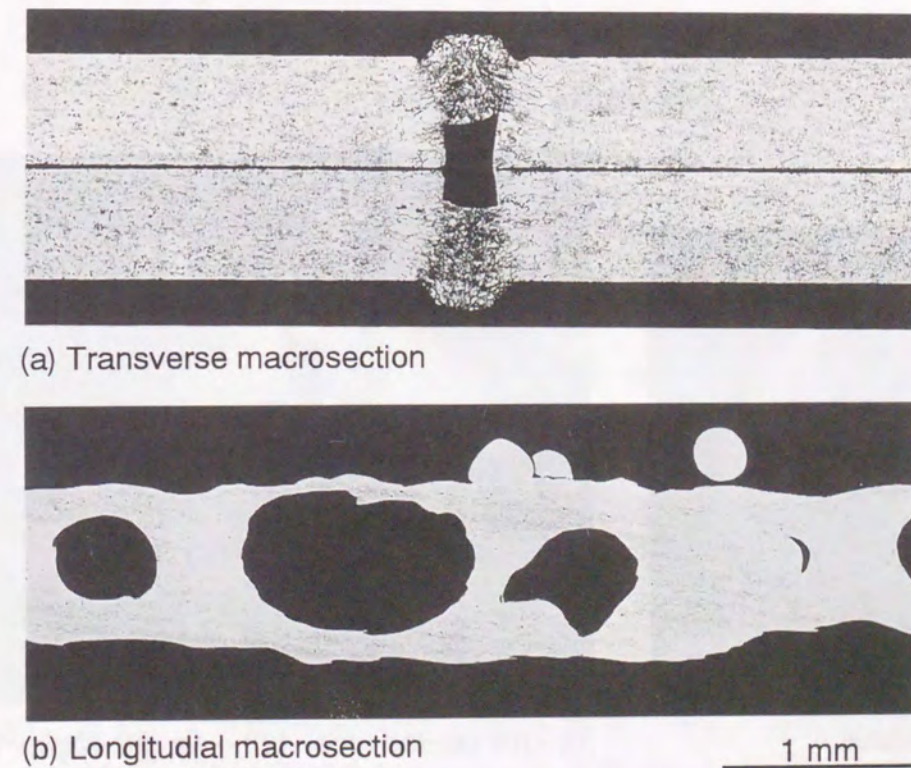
Transverse and longitudinal macro sections of zinc coated steel weld (zinc weight $40\text{g}/\text{mm}^2$)
